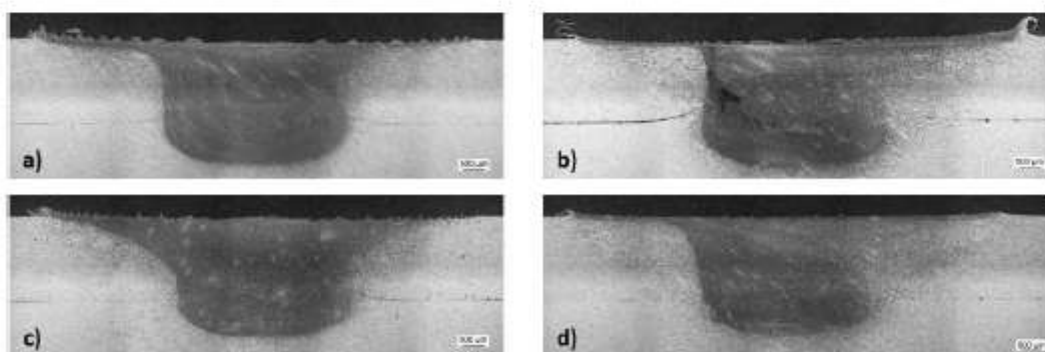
Cross-sections of FSW lap joints performed with a) Cylindrical threaded tool at 800rpm, 254mm/min and 6,4kN; b) Cylindrical threaded tool at 1200rpm, 152mm/min and 5,1kN; c) 3 flat tool at 800rpm, 254mm/min and 6,6kN; d) 3 flat tool at 1200rpm, 152mm/min and 5,1kN.
